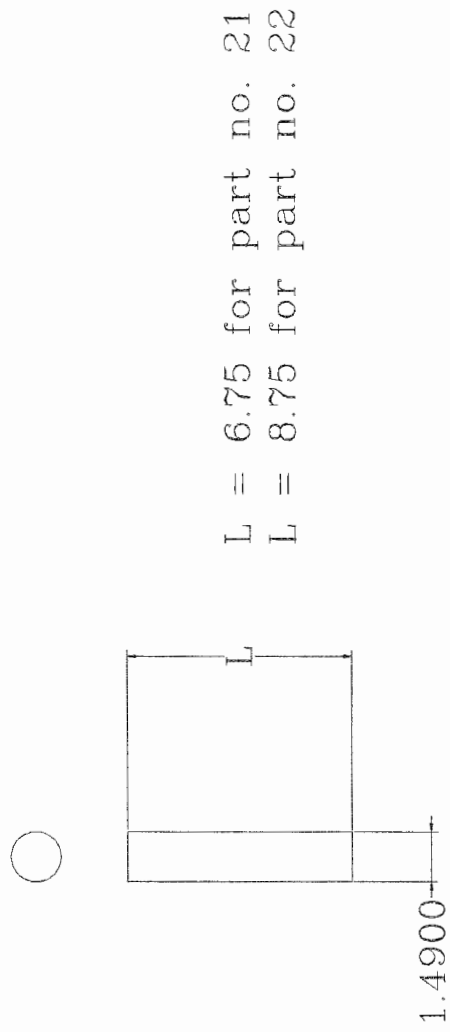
Part No. 21 & 22 LIDAR and RADAR Support Shafts
